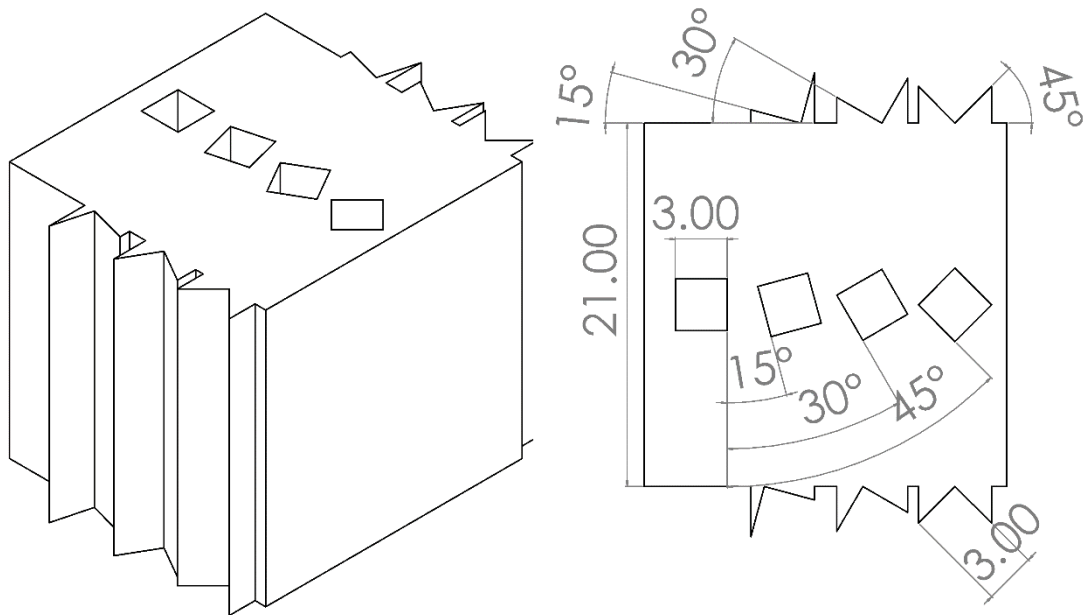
Isometric wireframe (left) and top-down wireframe (right) view of CAD of sample C. All linear dimensions are in millimeters.
